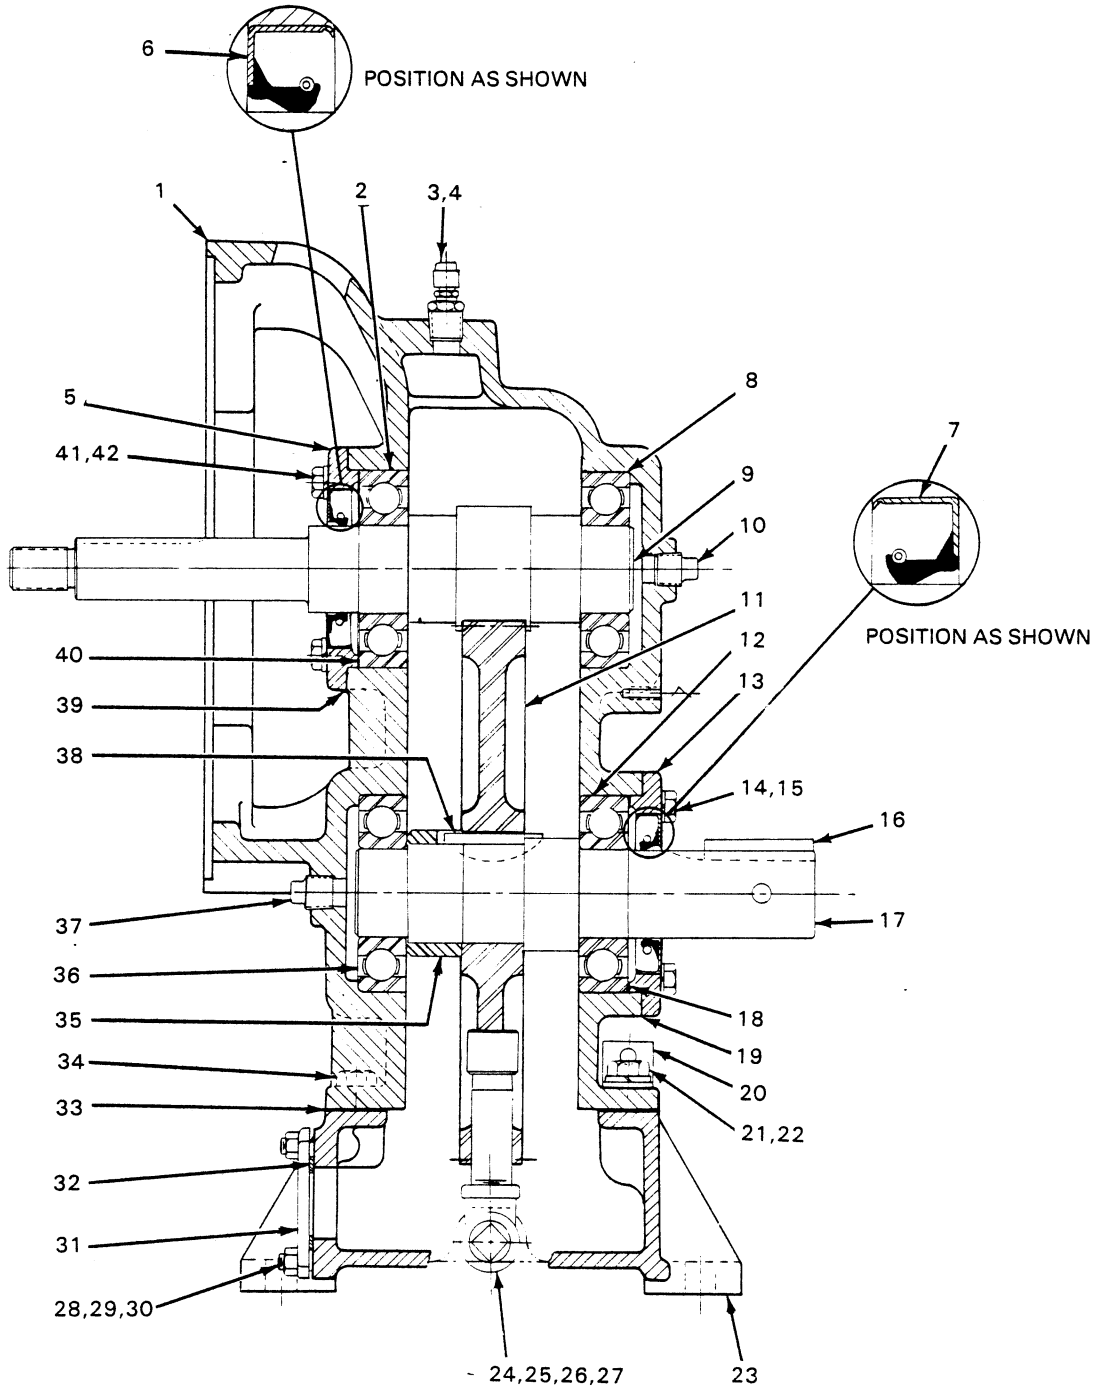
GRP44-17 Gearbox for Pump Model 64B2-G
